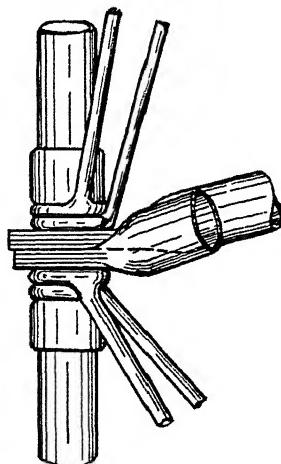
HYDE PIPE-DERRICK JOINT.
